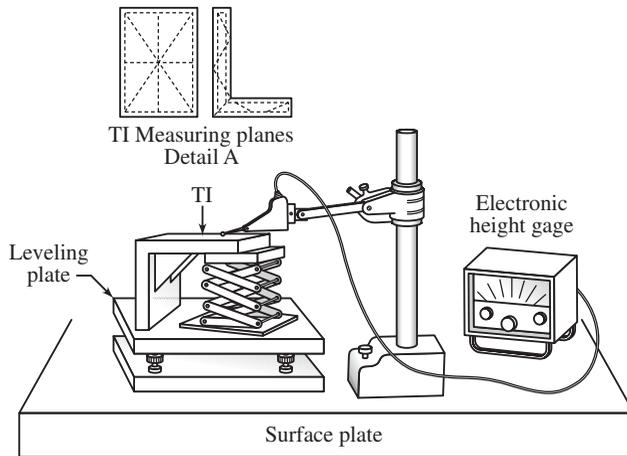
Measuring Flatness/Parallelism of Type III Right-angle Plate
